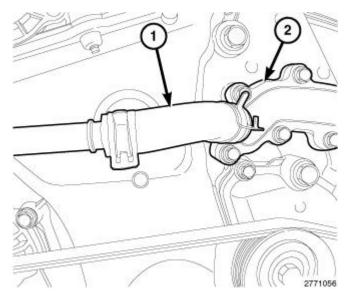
Heater Core Supply Hose & Coolant Outlet Housing Courtesy of CHRYSLER GROUP, LLC
